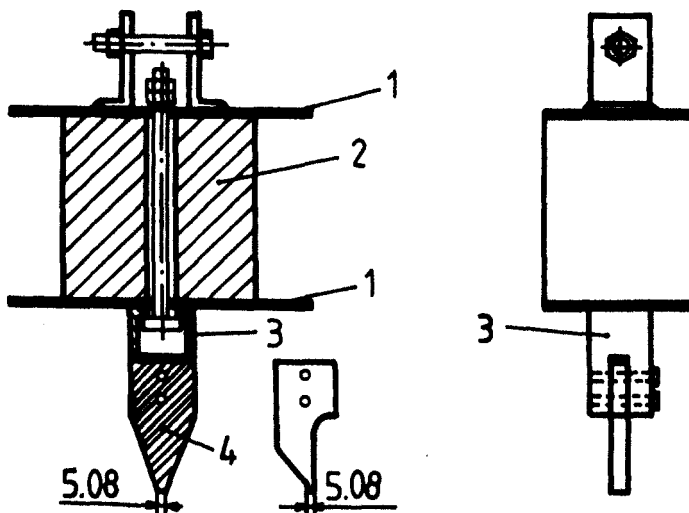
The tup. 1) steel sheets, 2) wood stock, 3) tup head connector, and 4) tup heads.
